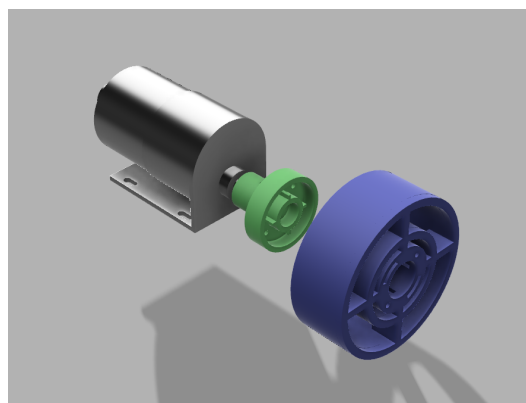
Breakout of the attachment of the haptic wheel to the motor, front view.
